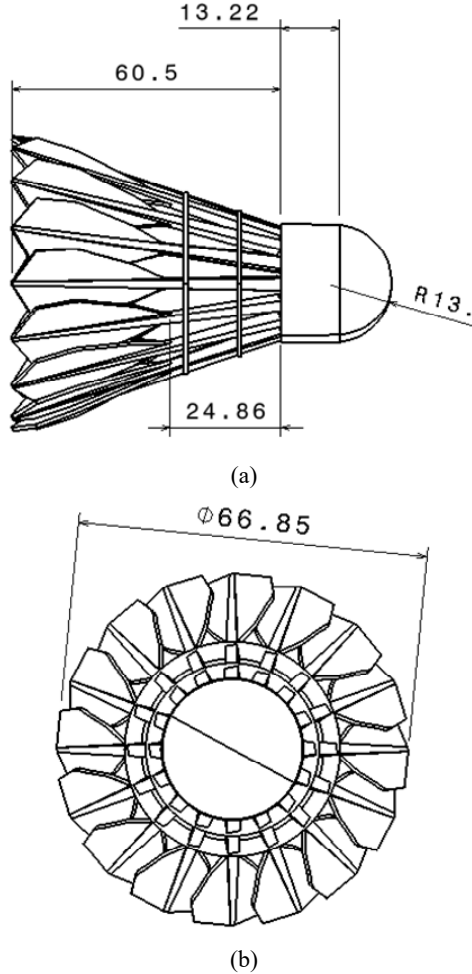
(a) Front view of nylon shuttlecock dimensions
